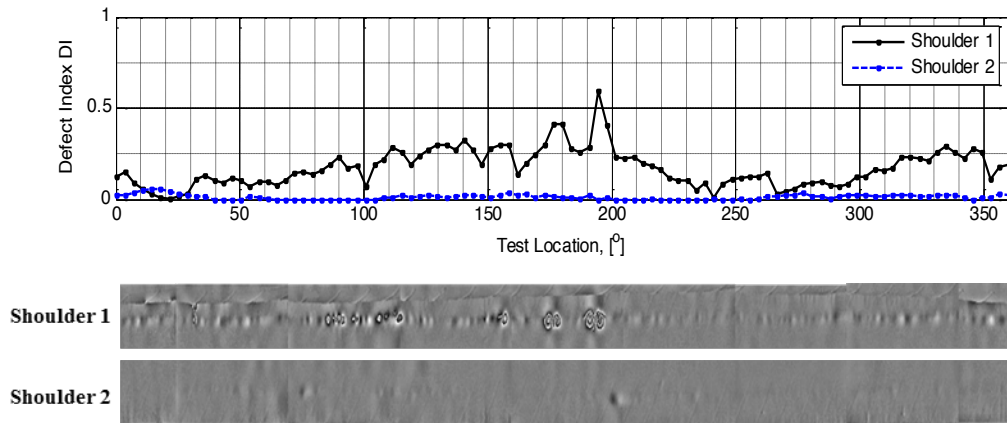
Defect indices for a tire with discontinuous small cracks in one shoulder
